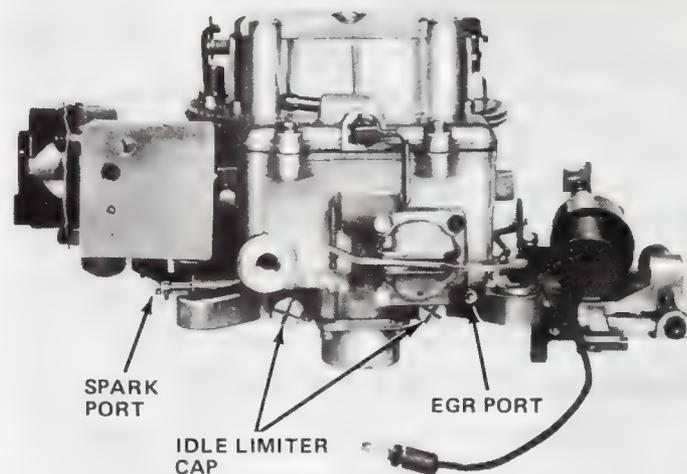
J-13 Motorcraft Model 2100 Carburetor
